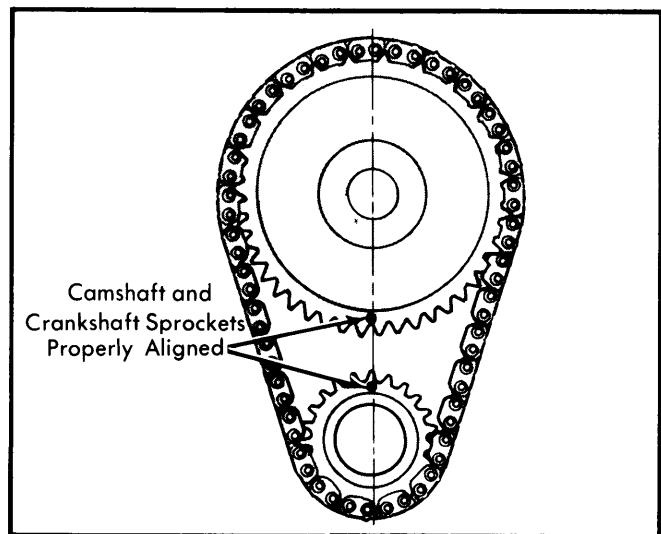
Camshaft and Crankshaft Timing Chain Sprocket Alignment
